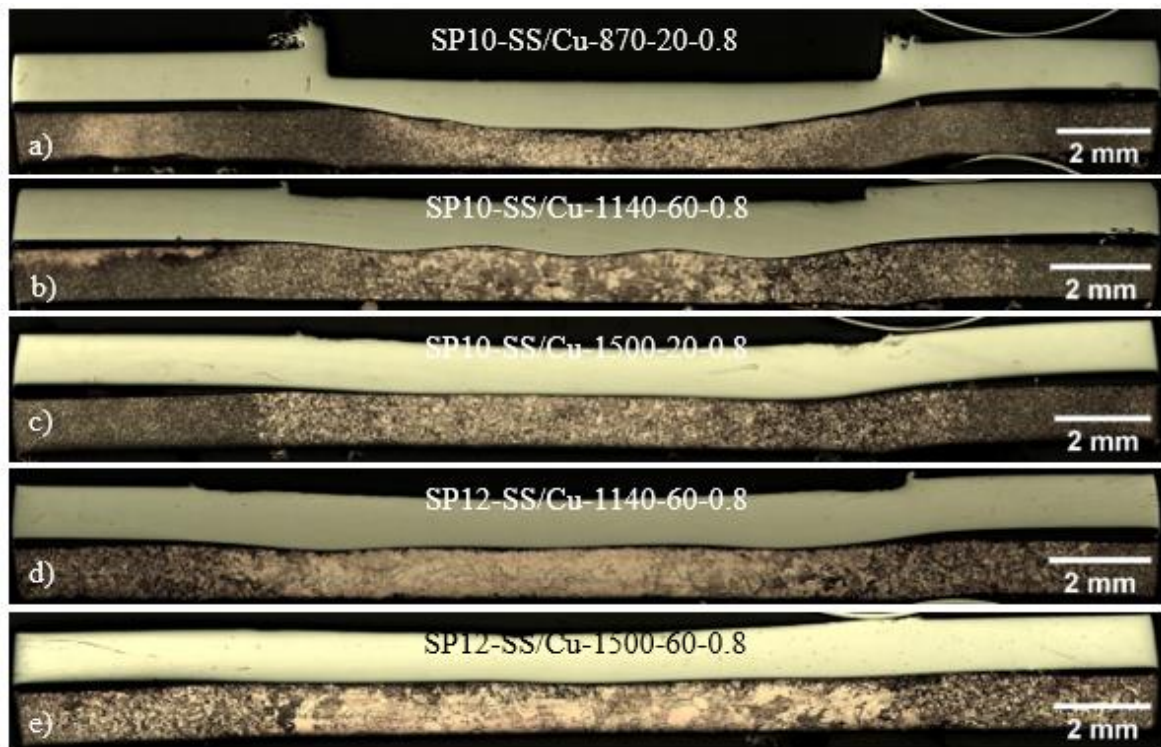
Transverse cross-section macrographs of the welds after copper's etching: a) SP10-SS/Cu-870-20-0.8, b) SP10-SS/Cu-1140-60-0.8, c) SP10-SS/Cu-1500-20-0.8, d) SP12-SS/Cu-1140-60-0.8, and e) SP12-SS/Cu-1500-60-0.8.
